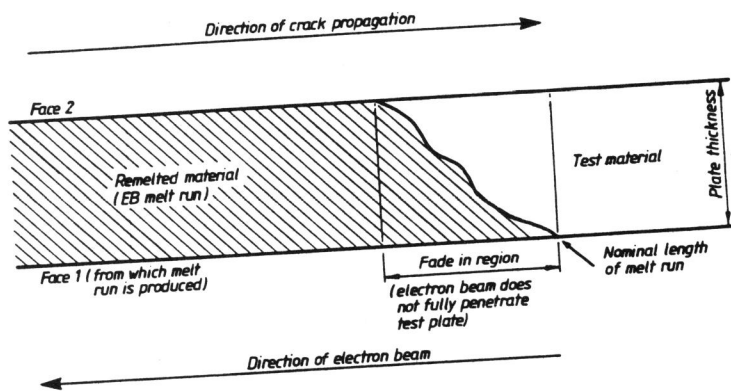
Longitudinal cross-section through wide plate in the 'fade-in' region of the electron beam crack starter section.
